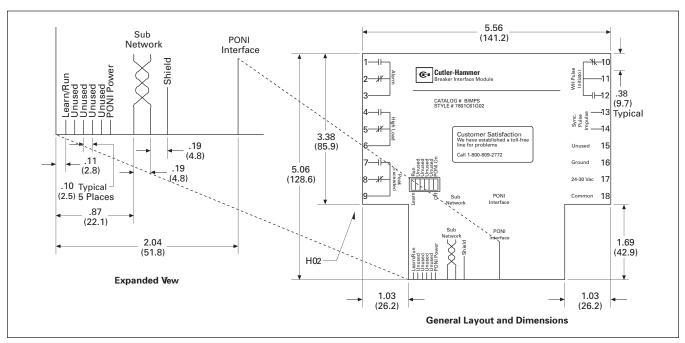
Connections and DIP Switch Rear Label Diagram — Dimensions in Inches (mm)
